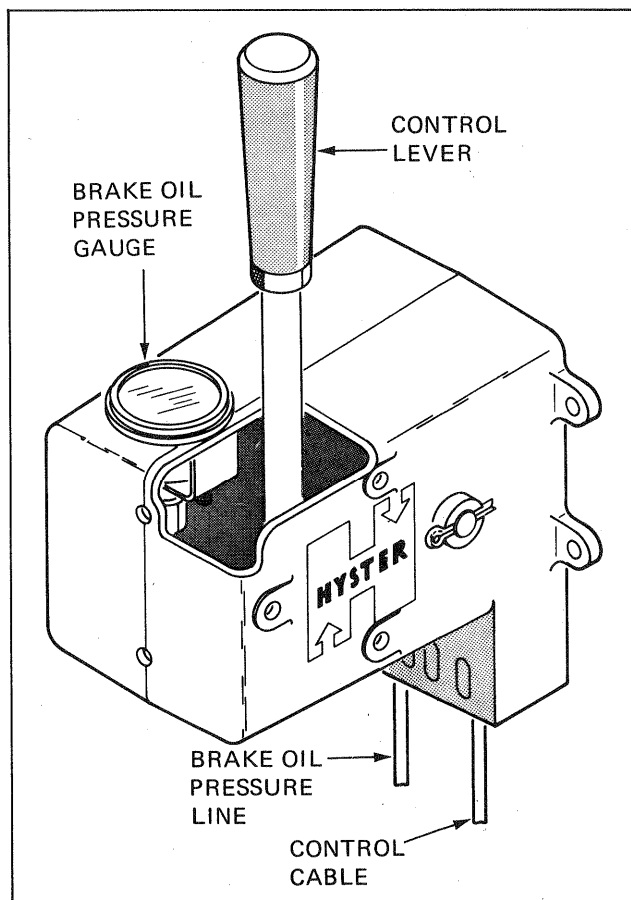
POWER CONTROLLED HANDLING GEAR
